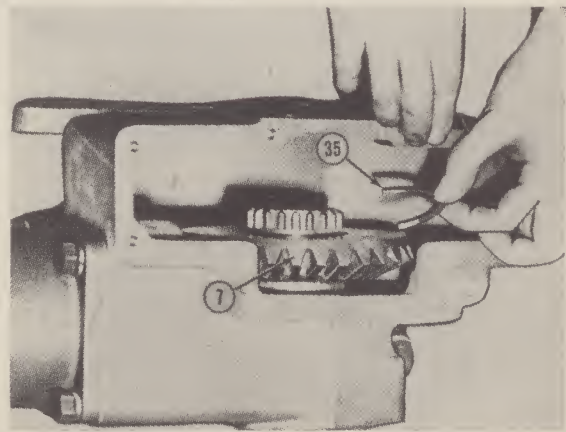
Inserting split lock rings (35) used (6 speed tractors) to locate the bevel gear (7) on hollow pulley shaft shown at (12) in Fig. 0614.
